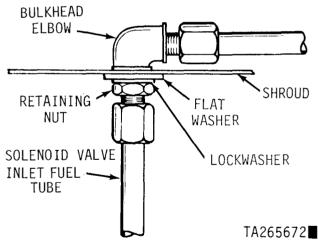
Removing or installing smoke generating fuel inlet line at bulkhead elbow,
